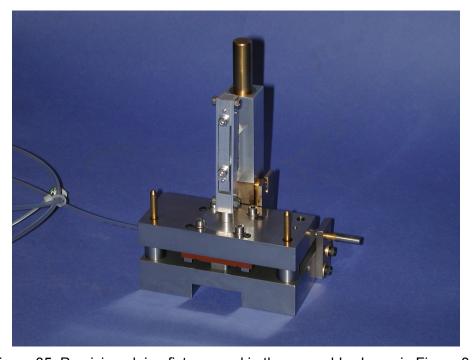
Precision gluing fixture used in the assembly shown in Figure 34.
